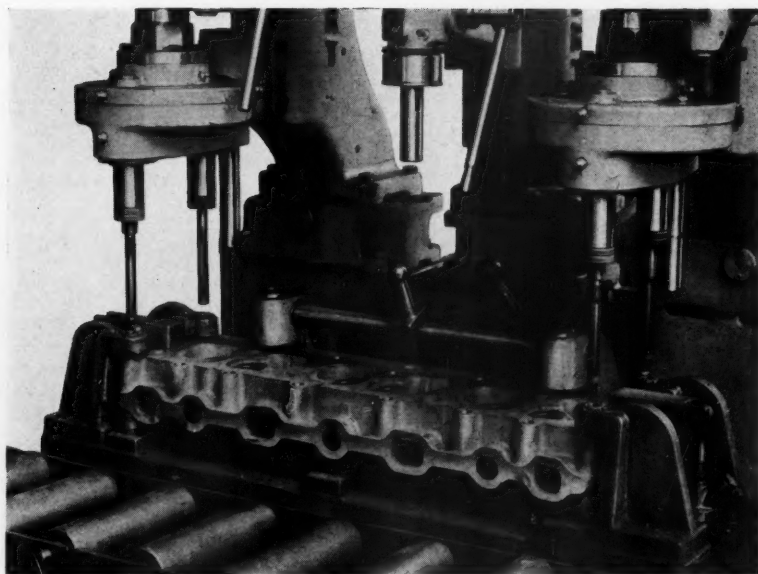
Reaming locating holes on a Herbert four-speed sensitive drilling machine.
